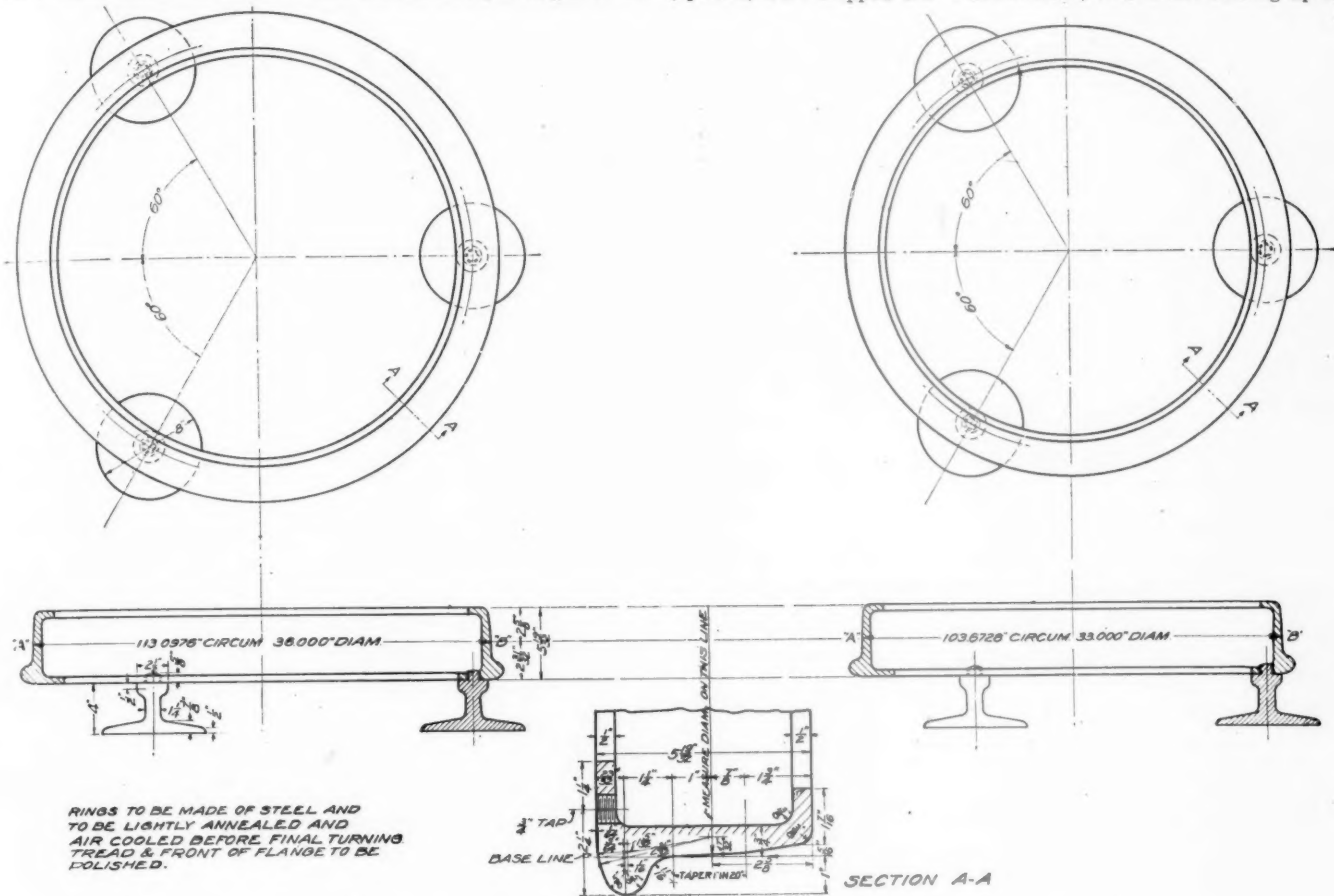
Exhibit A.—Wheel Circumference Measure Test Rings for 33-in. and 36-in. Wheels
